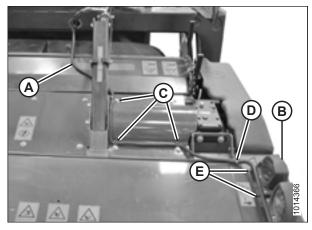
Harness Routing – R113 Shown, R116 Similar
